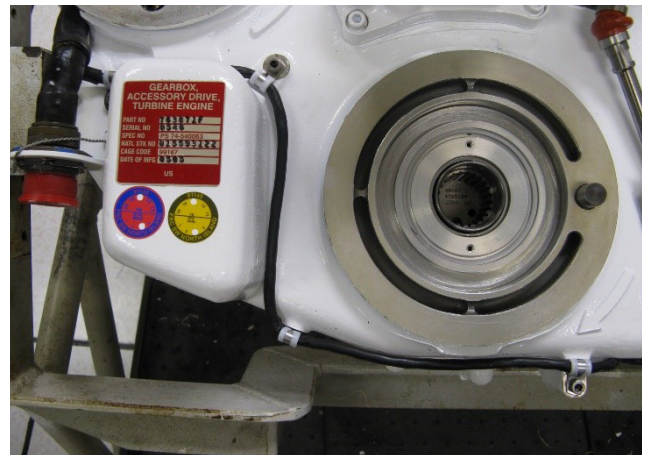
Hydraulic pump pad after final machining of cold spray repair. Transmission is fully assembled and resting in the engine test stand. Courtesy of Applied Research Laboratory, Penn State.
